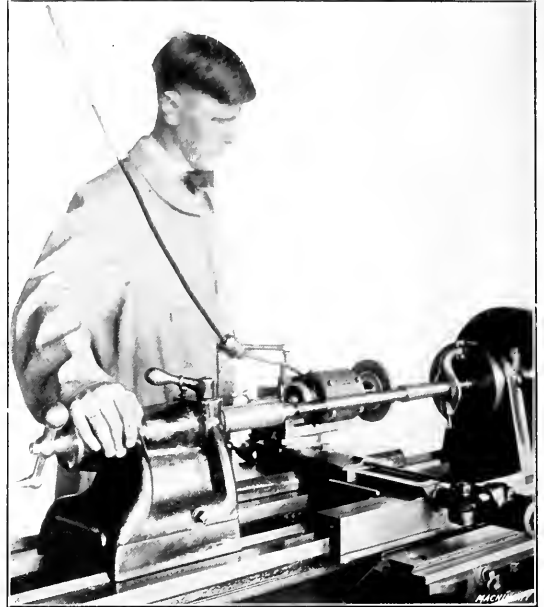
Grinding Work on Centers with the Wisconsin Grinder
